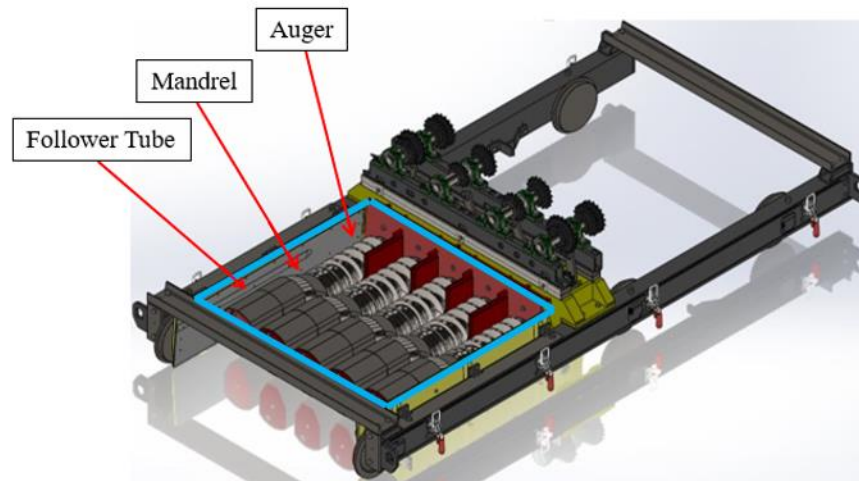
Extruder mechanism sectional cut. Compaction chamber highlighted in light blue, follower tube, mandrel, and auger labeled [1]
